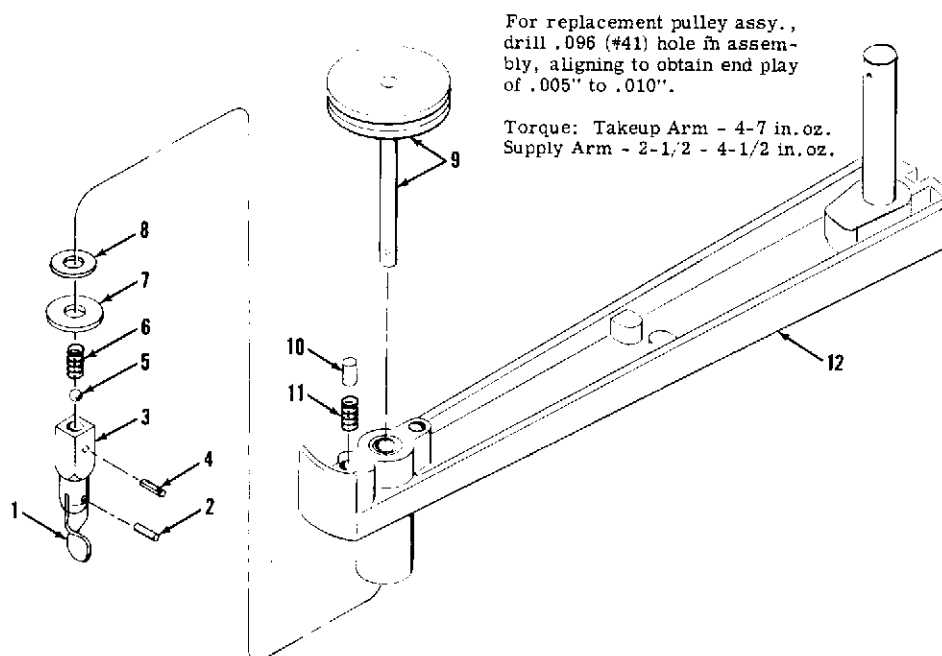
DISASSEMBLY AND REASSEMBLY OF SUPPLY AND TAKE-UP REEL ARMS COMPLETE
